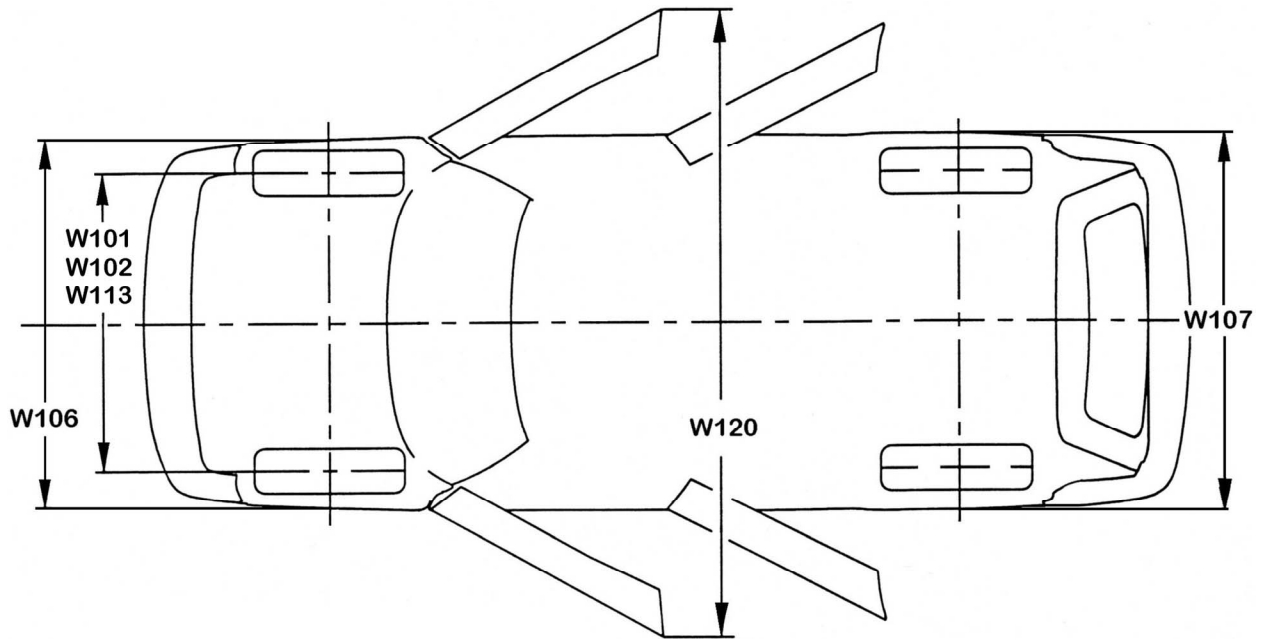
A—PLAN VIEW OF VEHICLE. SEE FIGURE 21B FOR DETAILS OF W101, W102, AND W113 DIMENSIONS
